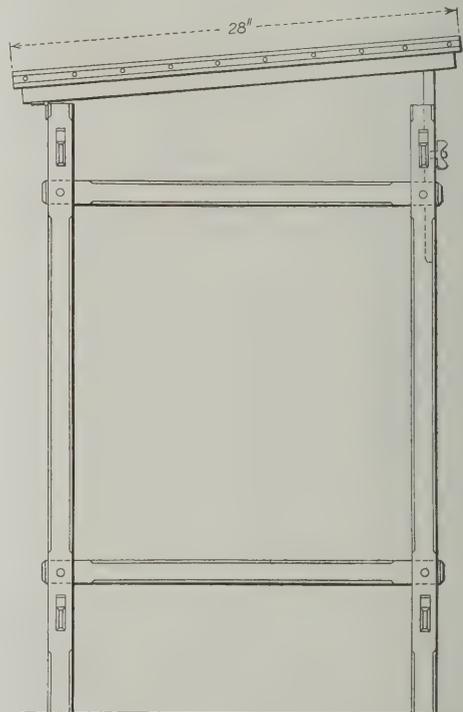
Front Elevation—Scale 1 In. to the Foot
